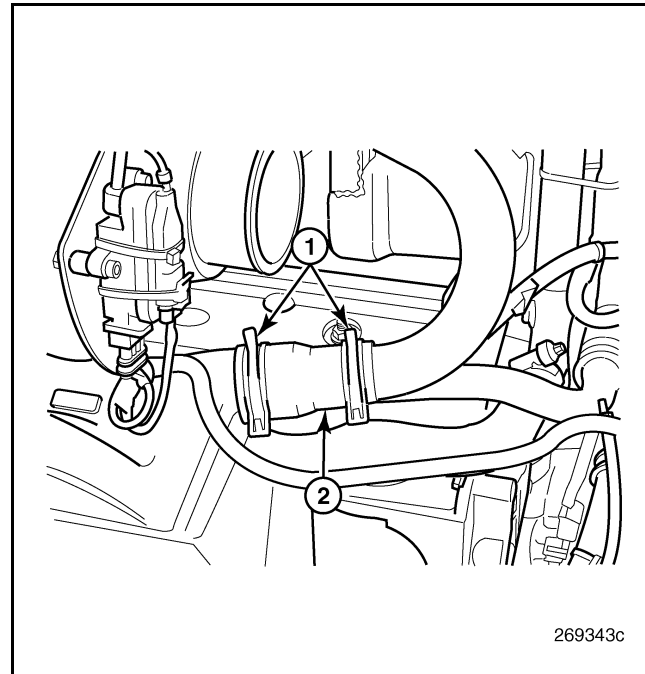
Cool Tube Hose Connection (Cooler Connection Shown)
